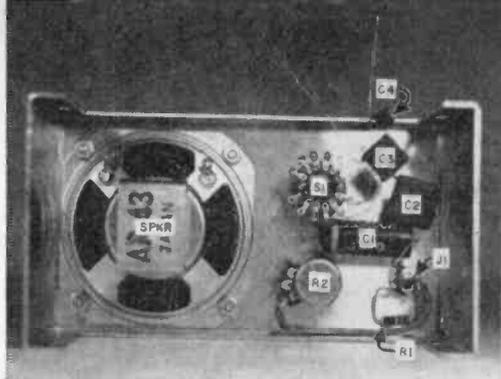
Begin the wiring after placing the parts as shown in the photograph. Solder all connections.
